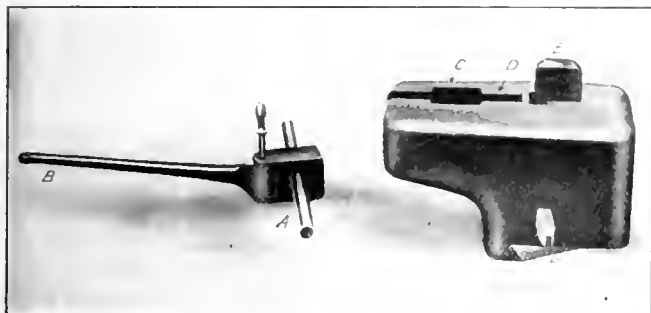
Upsetting Attachment for Preparing Heavy Shafts for Welding.
